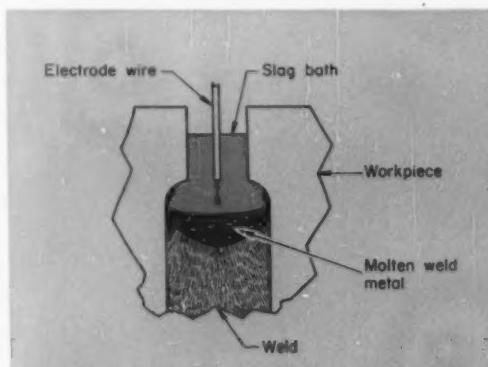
Diagram of electro-slag welding process. Arc is immersed in a bath of molten slag. Electrode is consumed.
